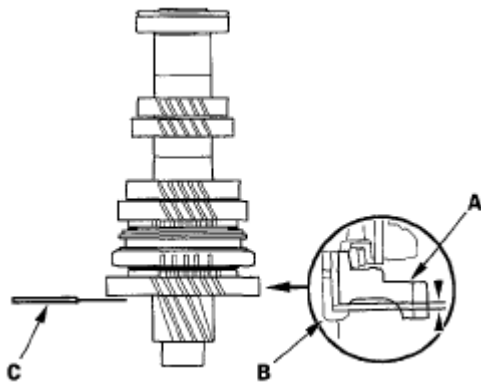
Measuring Clearance Between 1st Gear And Distance Collar With Feeler Gauge
